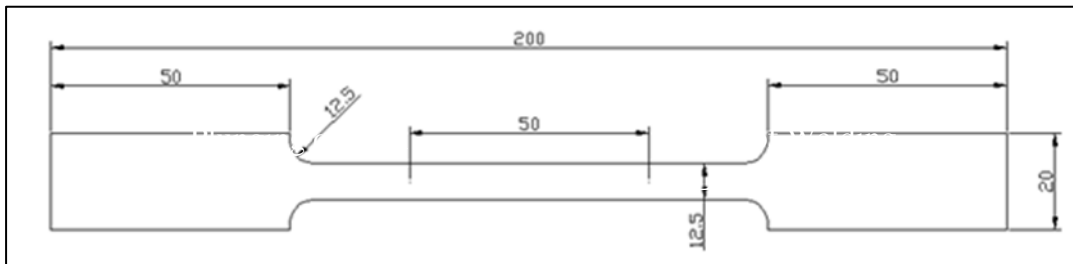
Tensile test specimen (all dimensions in mm) [8]
